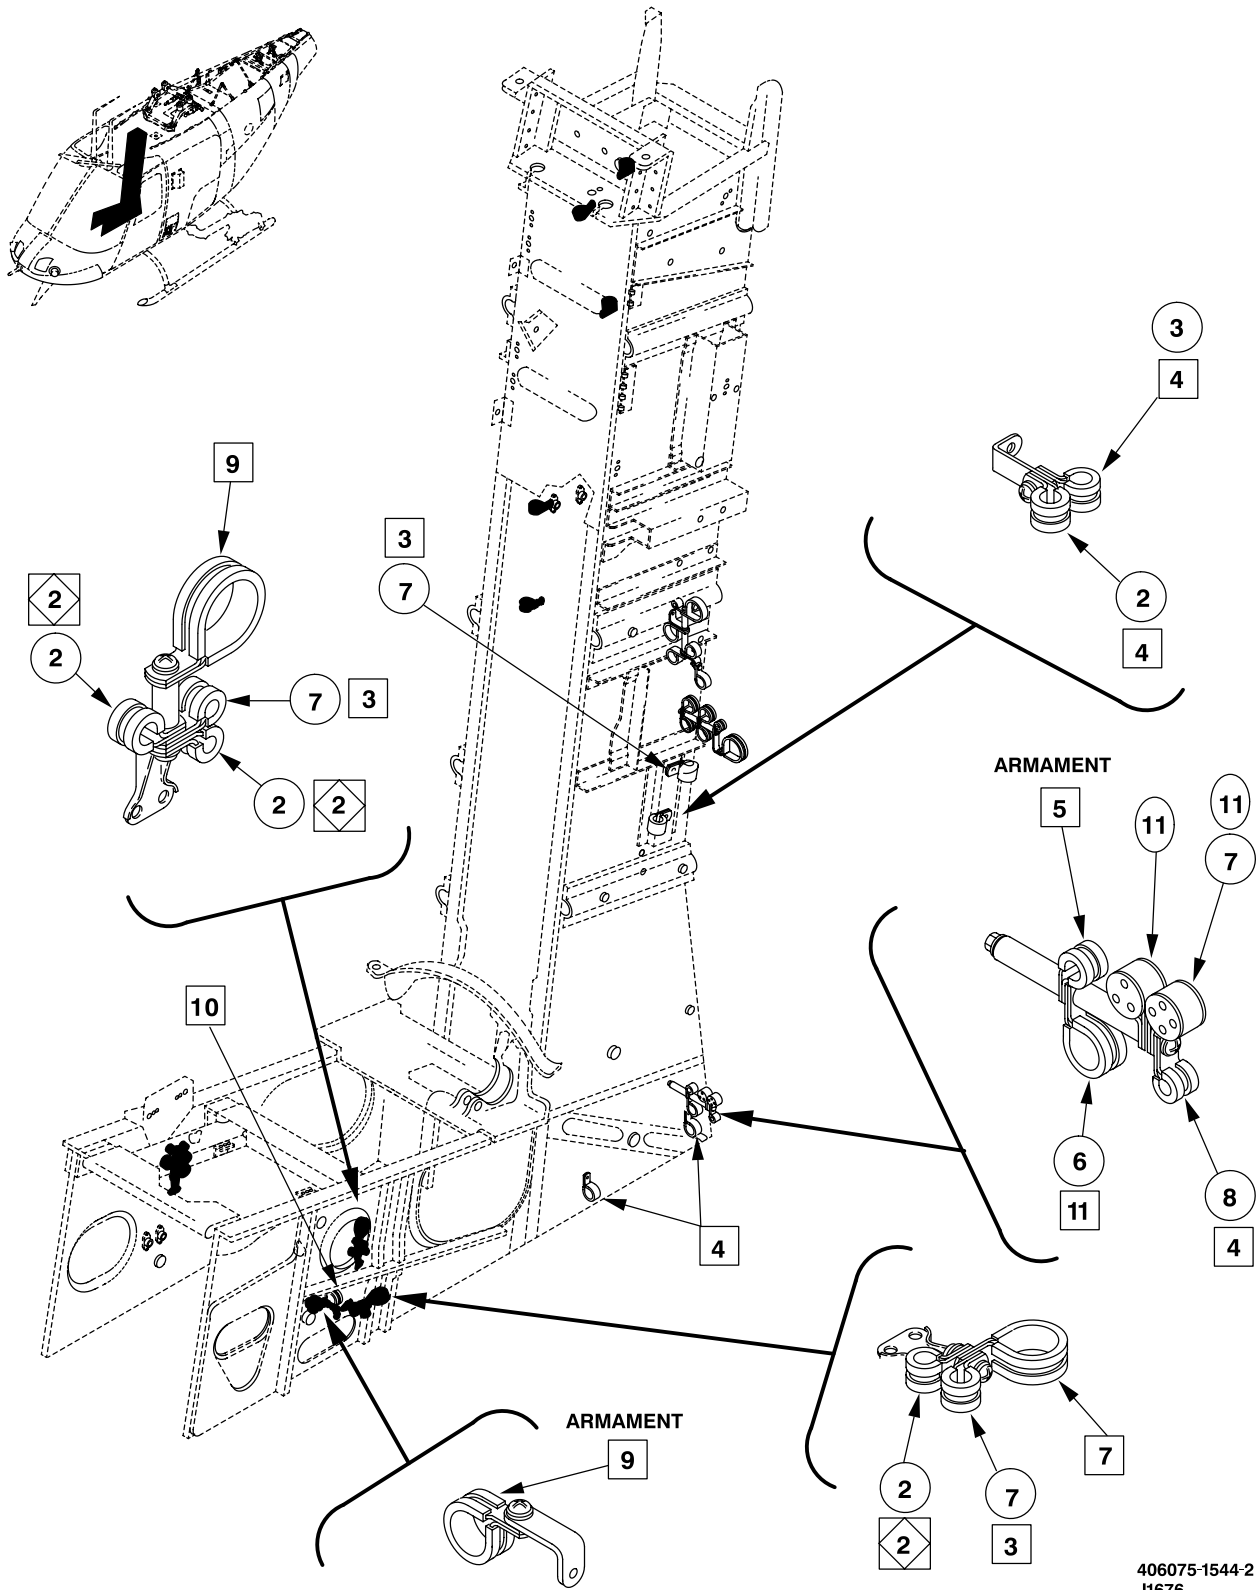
Nose Section Electrical Clamping and Routing (OH-58D(R)) (Sheet 9 of 9)
